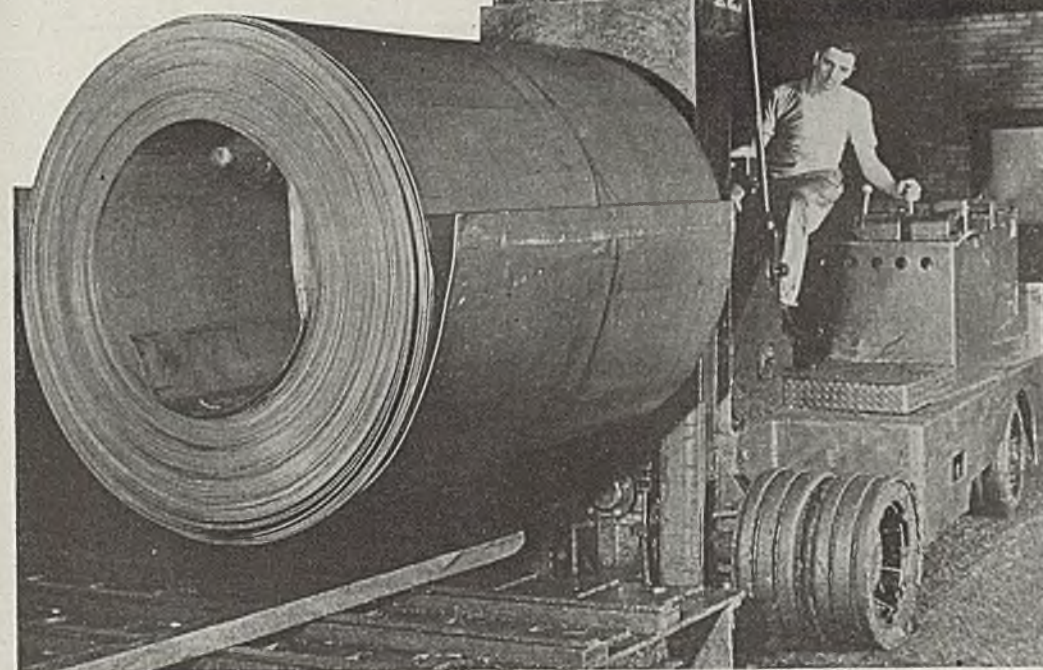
Cold strip department showing method of handling 22,000-lb coils
